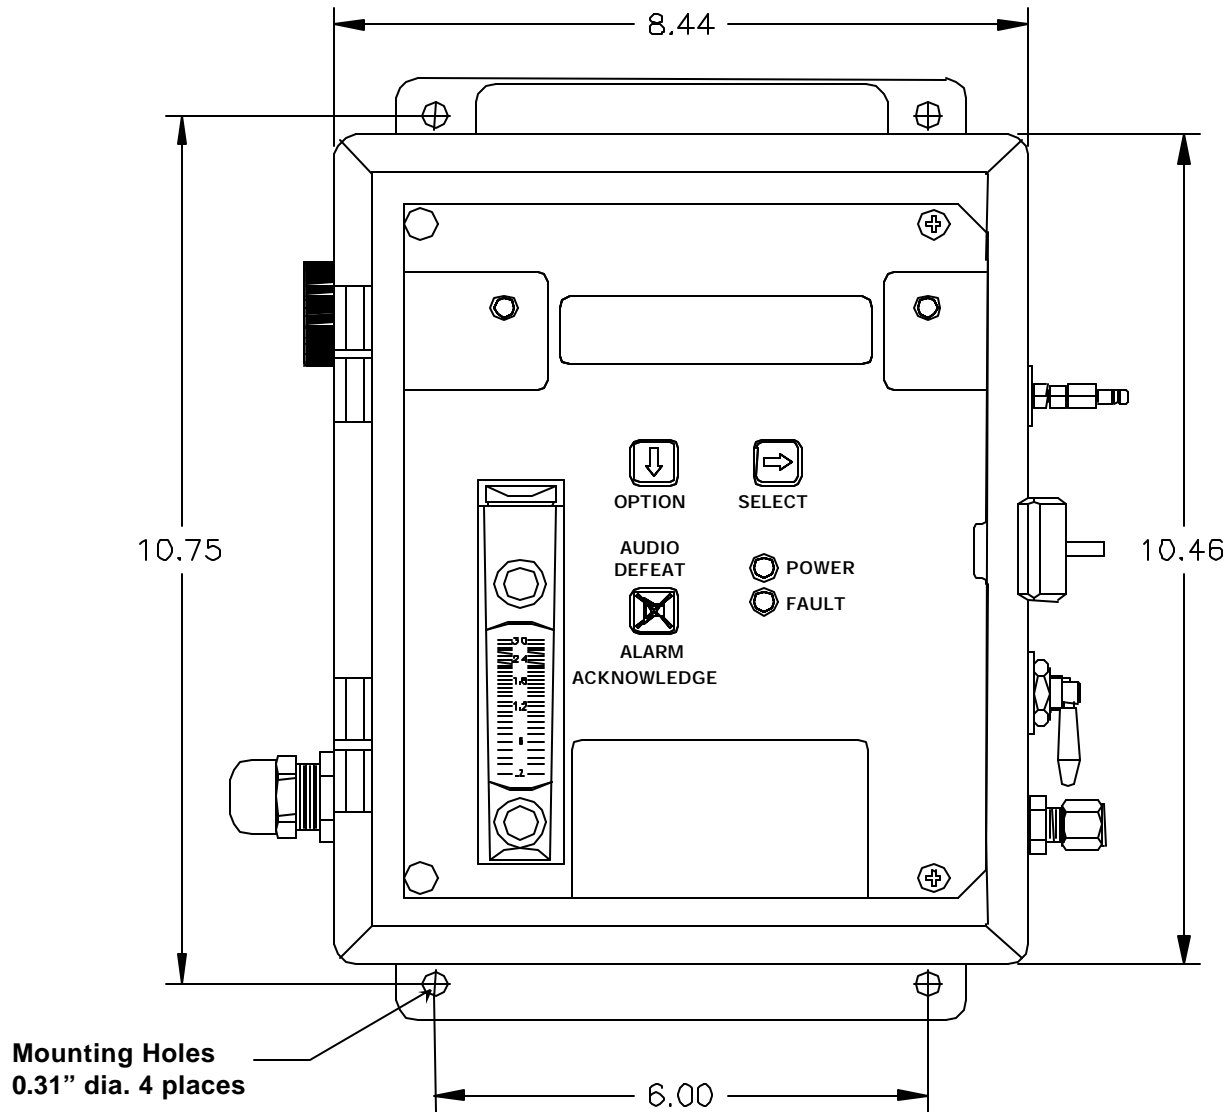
ISA-200 RAL(O) Mounting Dimensions
